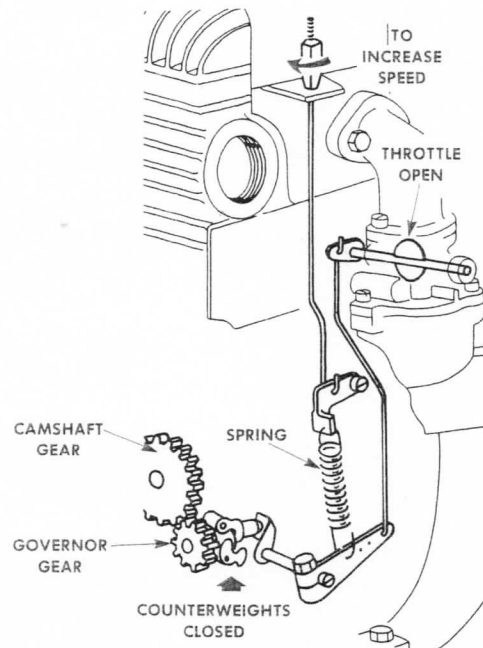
The governor spring tries to hold the throttle open. (Briggs & Stratton Corp.)
